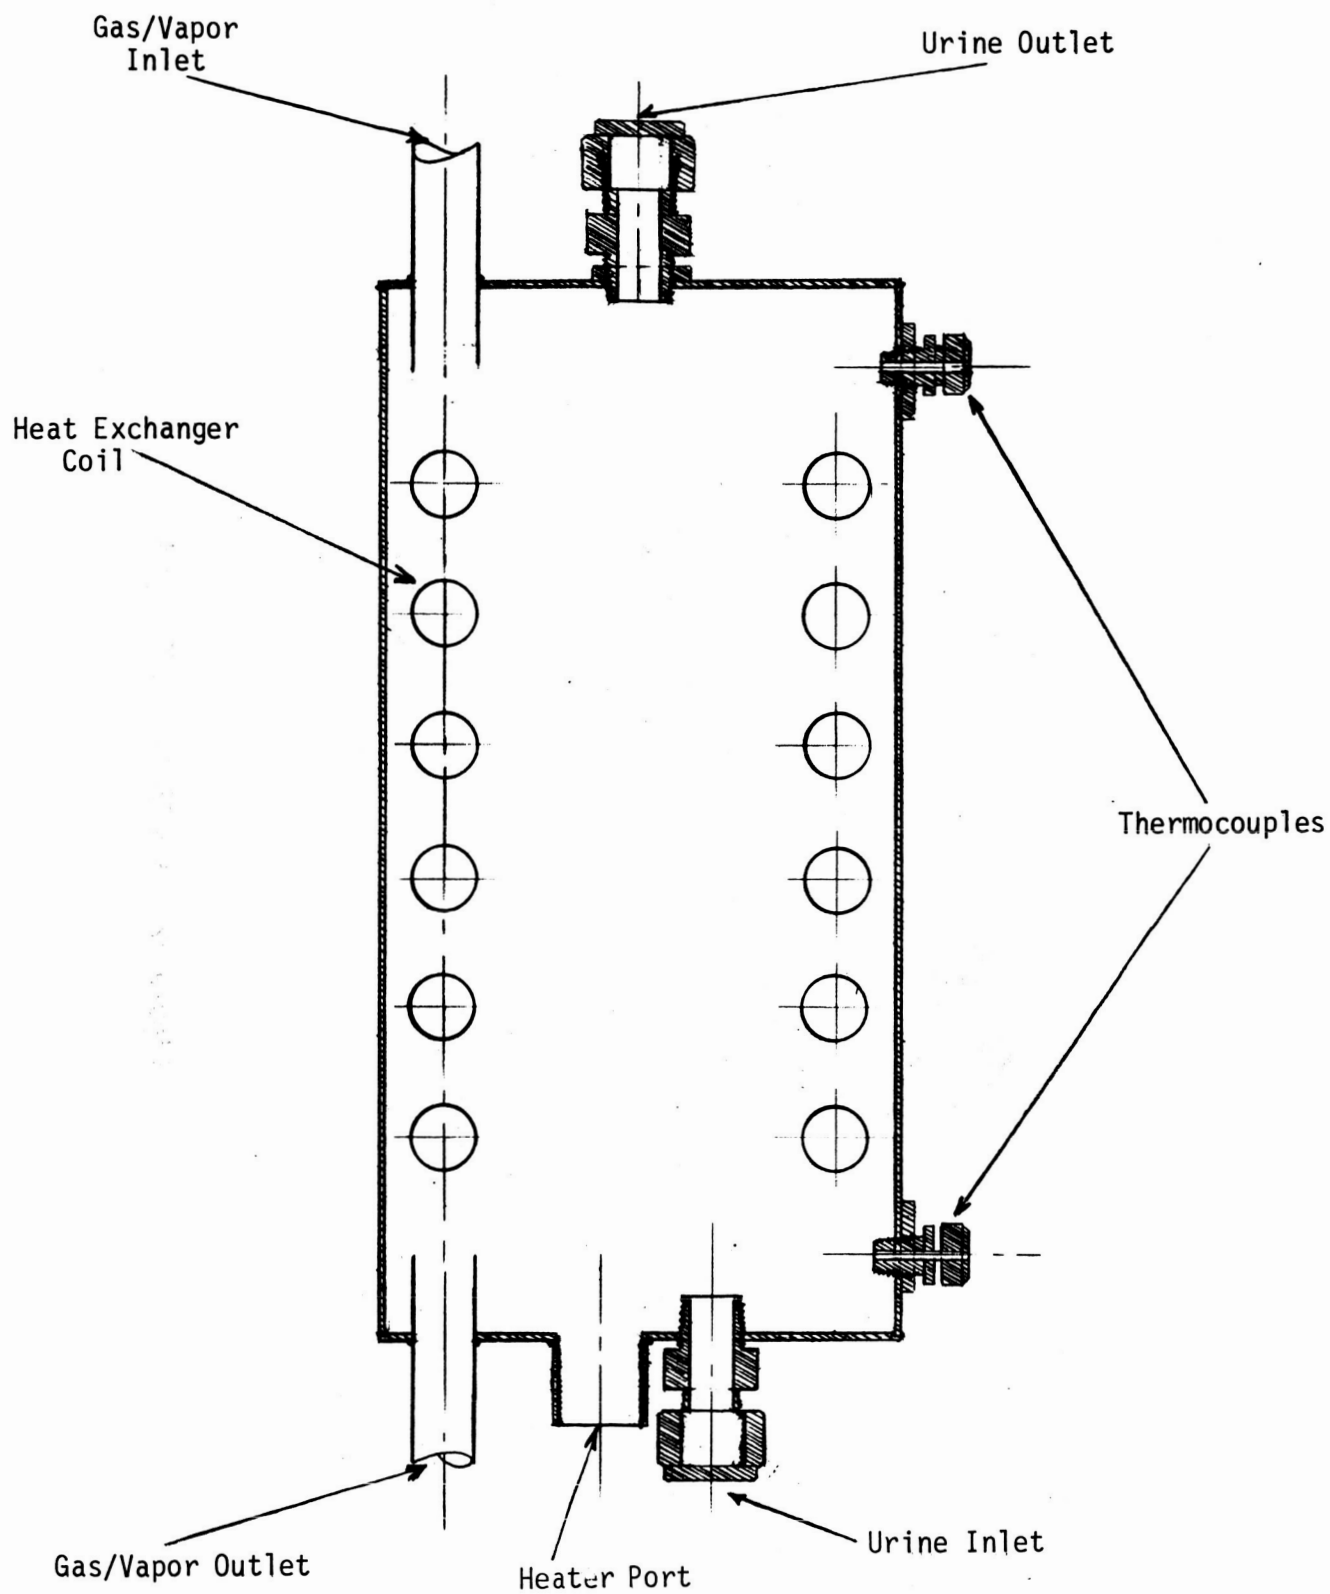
CUTAWAY VIEW OF THE RECYCLE TANK
